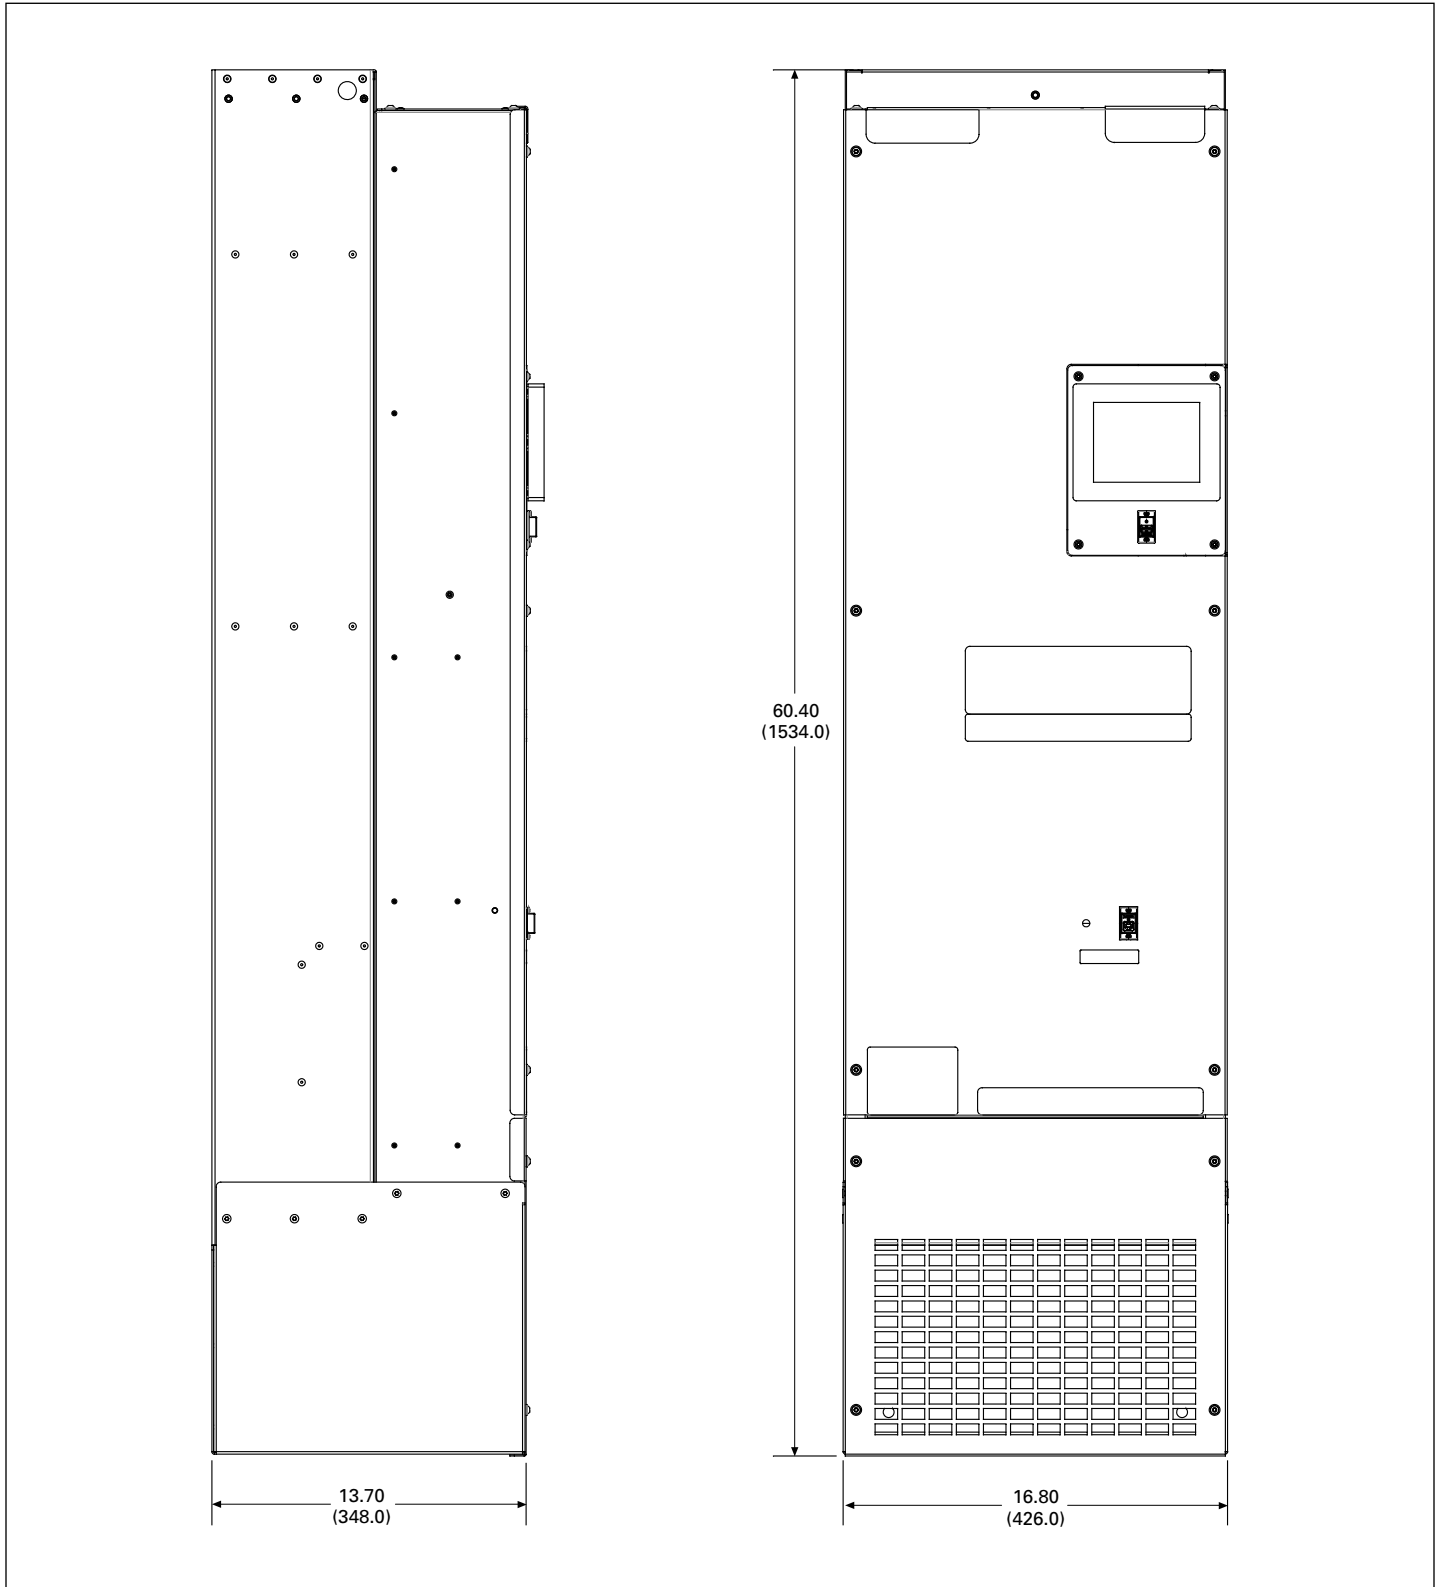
NEMA 1, 60 A—dimensions in inches (mm)
